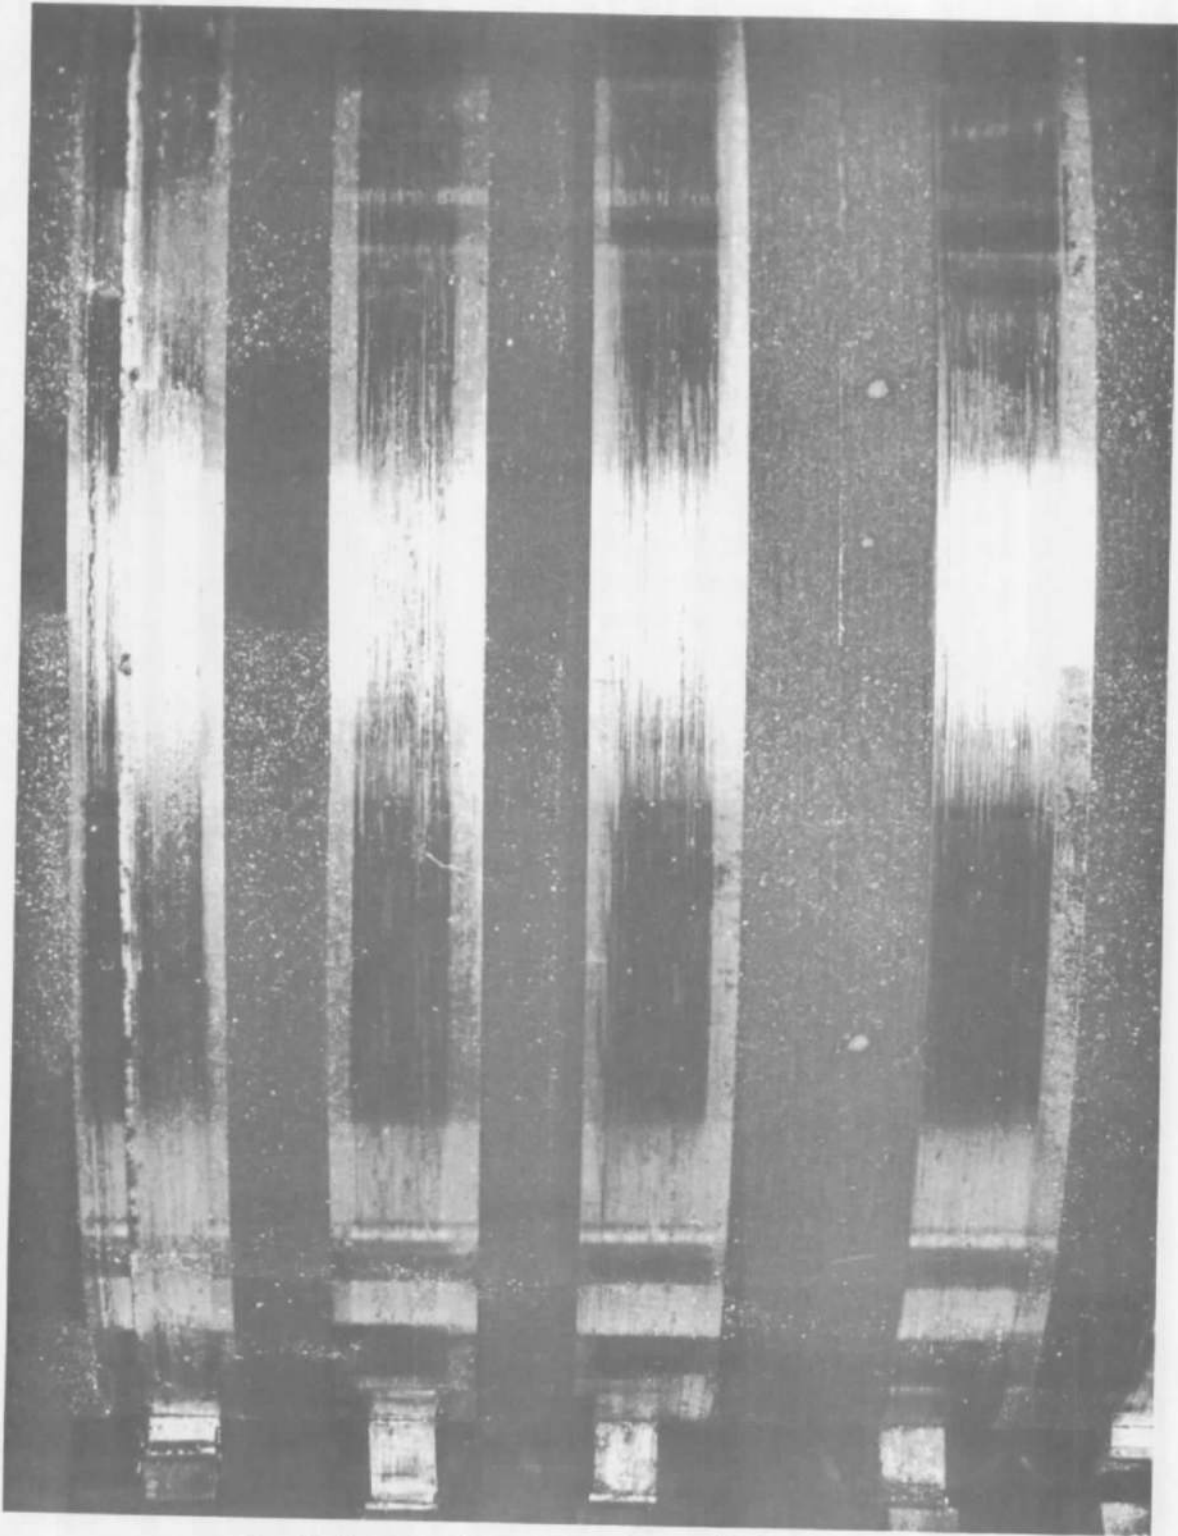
Detail on Rings 1 to 4 of Assembly 1 After Testing
